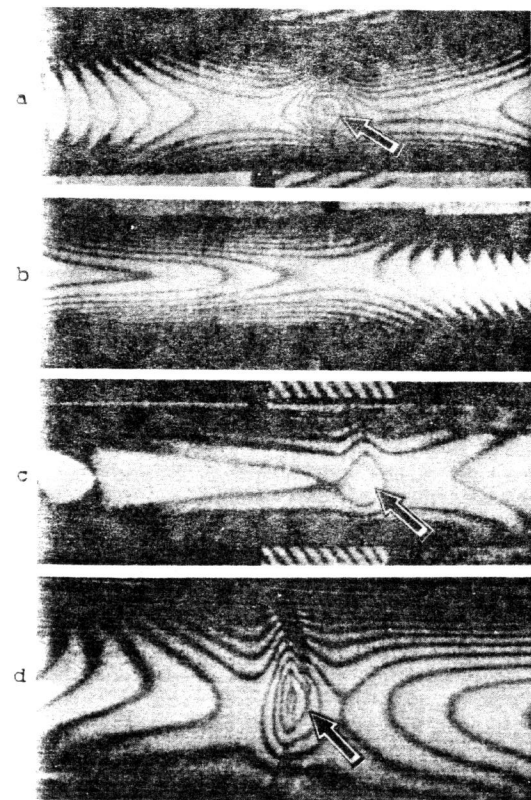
Interference fringe pattern in weld of stainless steel tubular elements.
